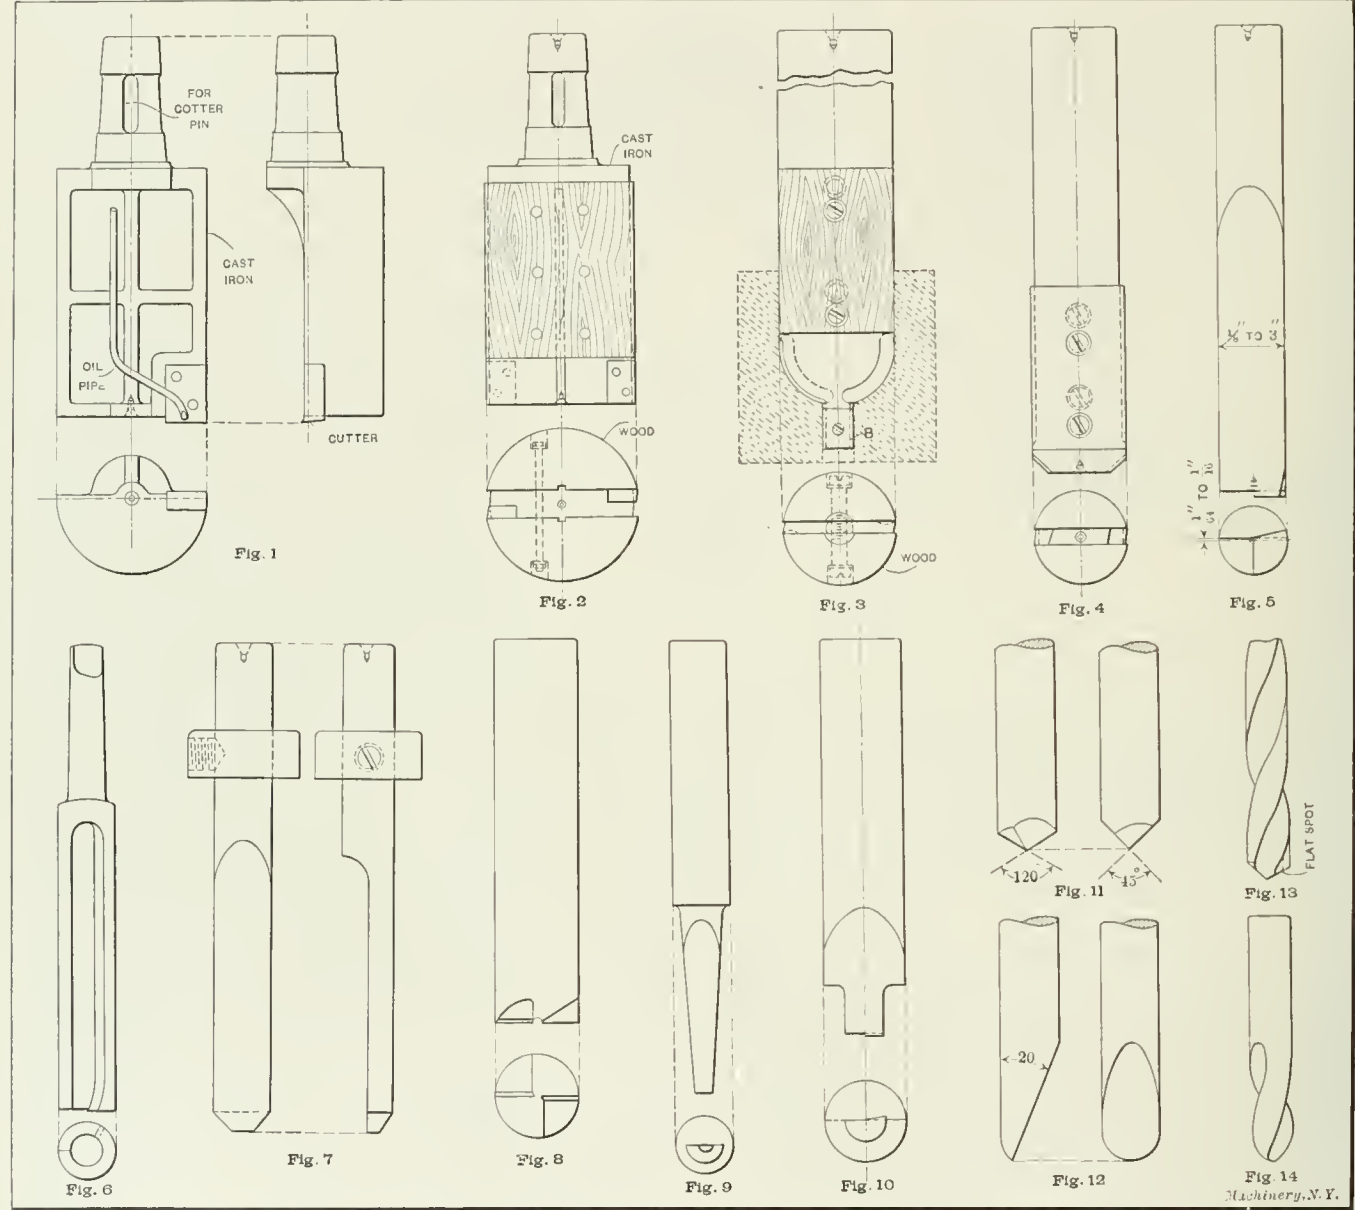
shows a drill that is made from drill rod by filing square cutting edges as shown, and it is used for squaring up the bottoms of small holes of odd sizes. A taper reamer that is also made from drill rod is shown in Fig. 9. This tool is much used on drop-forged dies, in which small taper holes are often needed for projections in the finished work, such as parts to be riveted, etc. Another useful tool for drop-forged work, that is made from drill rod is shown in Fig. 10. A little
